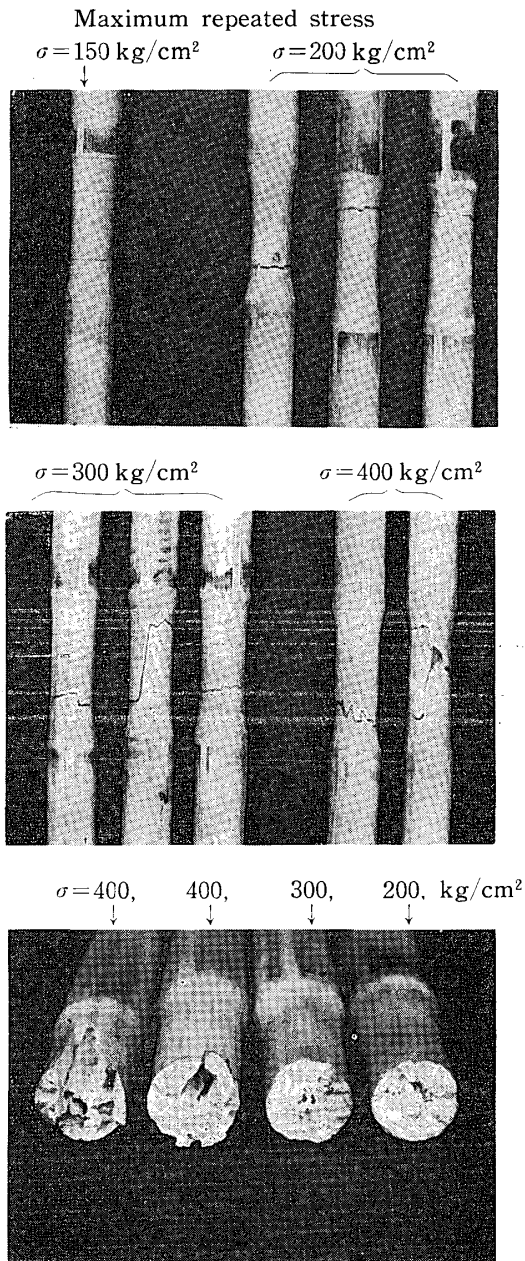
Failures in rotating bending fatigue test specimens of solid wood.
